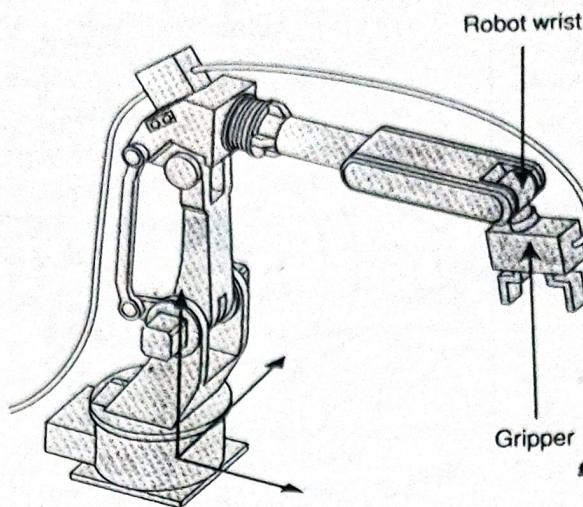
The Motoman-SK16 electrically controlled industrial robot illustrates here its six degrees of freedom and gripper. It is an articulated robot primarily designed for welding, assembly, and material-handling operations. (Courtesy of Motoman, Inc.)
